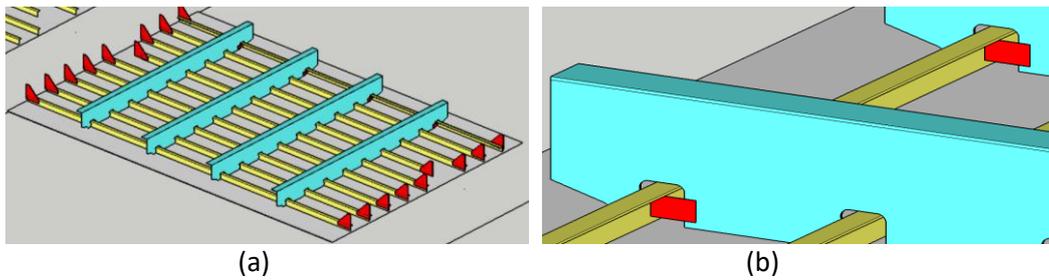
Joint (a) Bracket to longitudinal stiffener, and (b) Collar plate to web frame and stiffener
